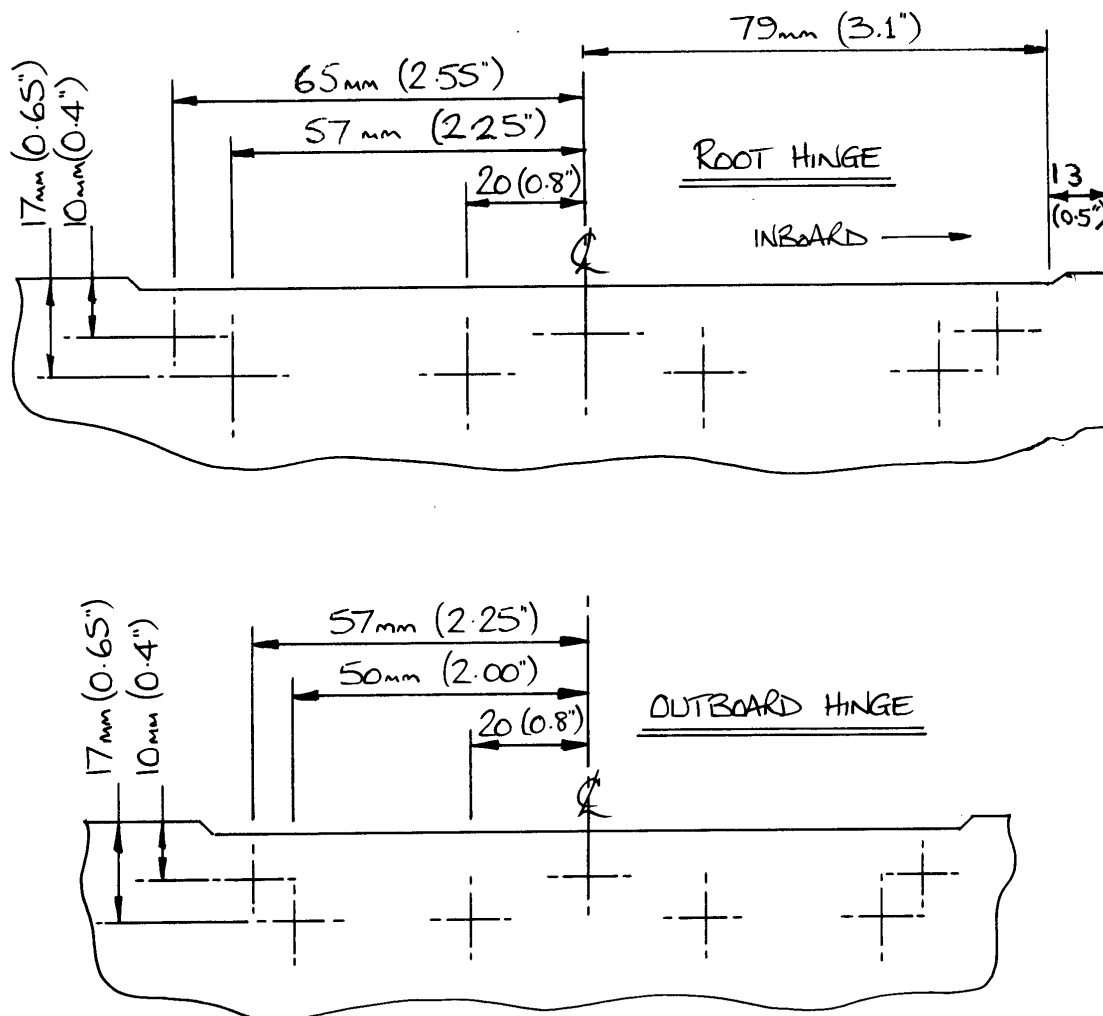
Rivet hole centres in flange - aileron L.E. not shown
